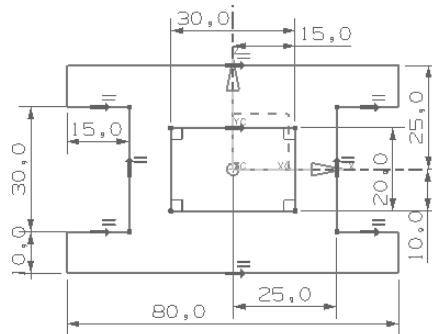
The resulting sketch after adding the required dimensions and constraints
